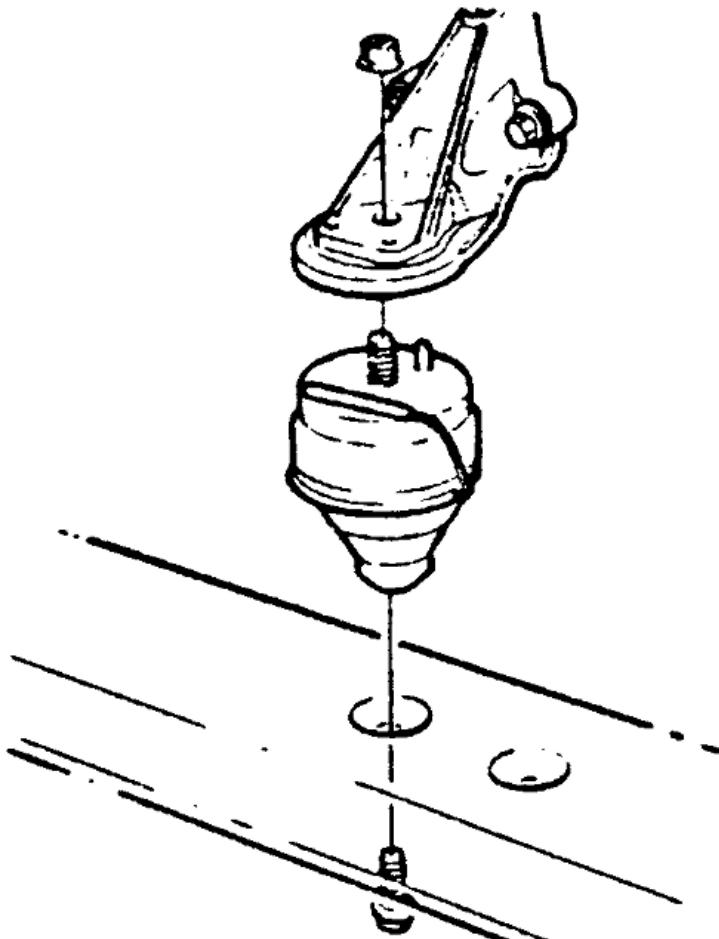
Typical engine mount on the 2.3L and 2.4L 5-cylinder engine
